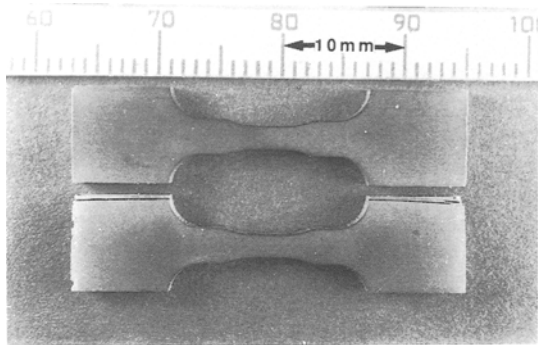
Tensile test specimens with the double-stepped geometry prepared by ultrasonic machining.
